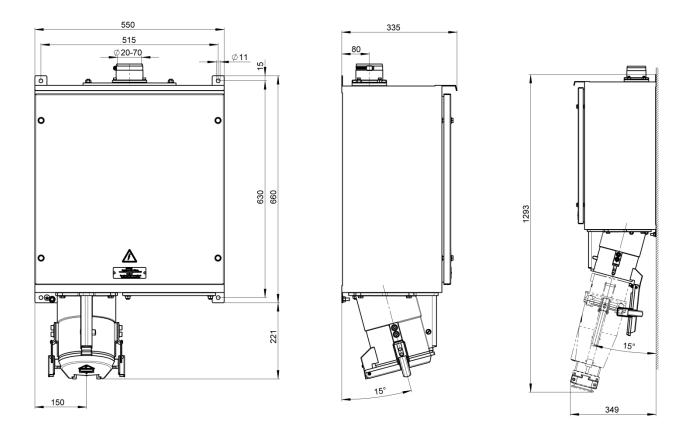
Dimensions, Connector Unit with Block Contactor CUBC B-Line (250 A - 400 A) in mm
